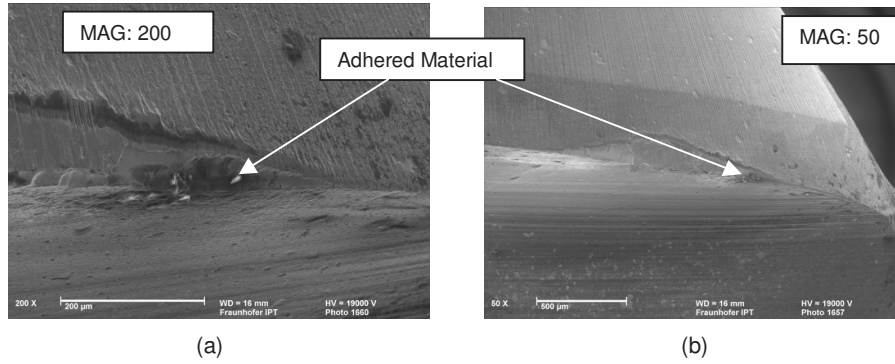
Tool wear (cutting speed 204 m/min, feed 0.05 mm/tooth, depth of cut 0.2 mm, width of cut 0.2 mm)
